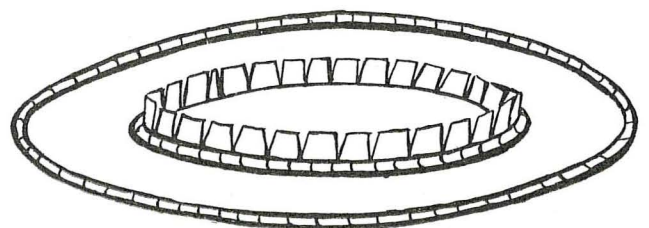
Fig. II. Sailor Shape of Willow with Wiring at Head-size and Edge of Brim.
